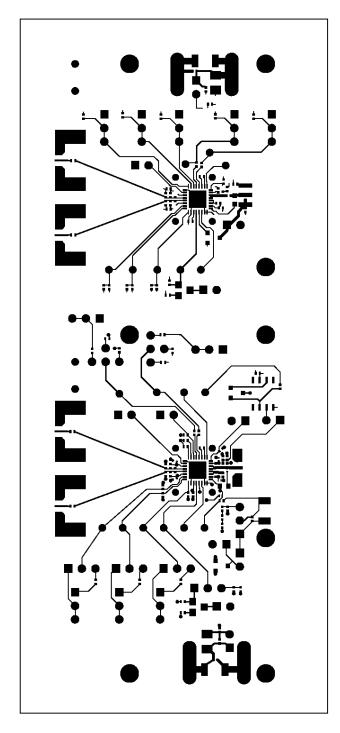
MAX3737 EV Kit PC Board Layout—Component Side
